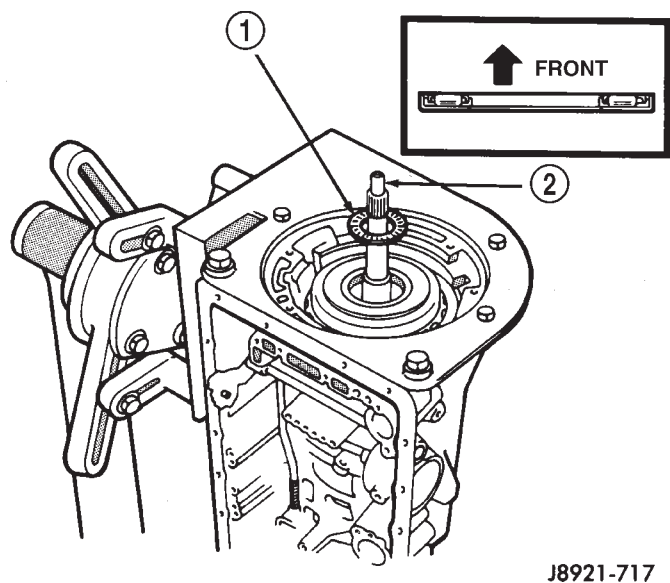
Installing Input Shaft Thrust Bearing And Race Assembly
